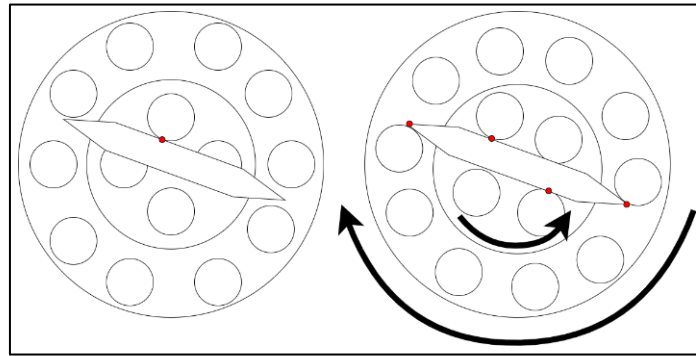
Contact point between fixture and workpiece with (right) and without (left) rotating
